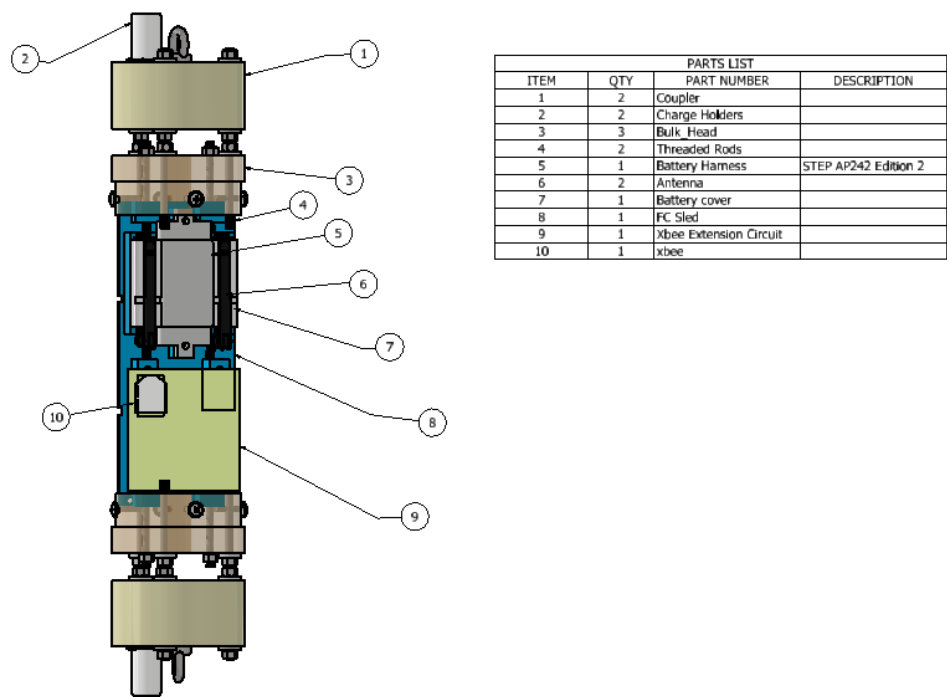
Full avionics bay assembly parts list with annotated component identifications and sub-assembly references. Authors’ own CAD.
